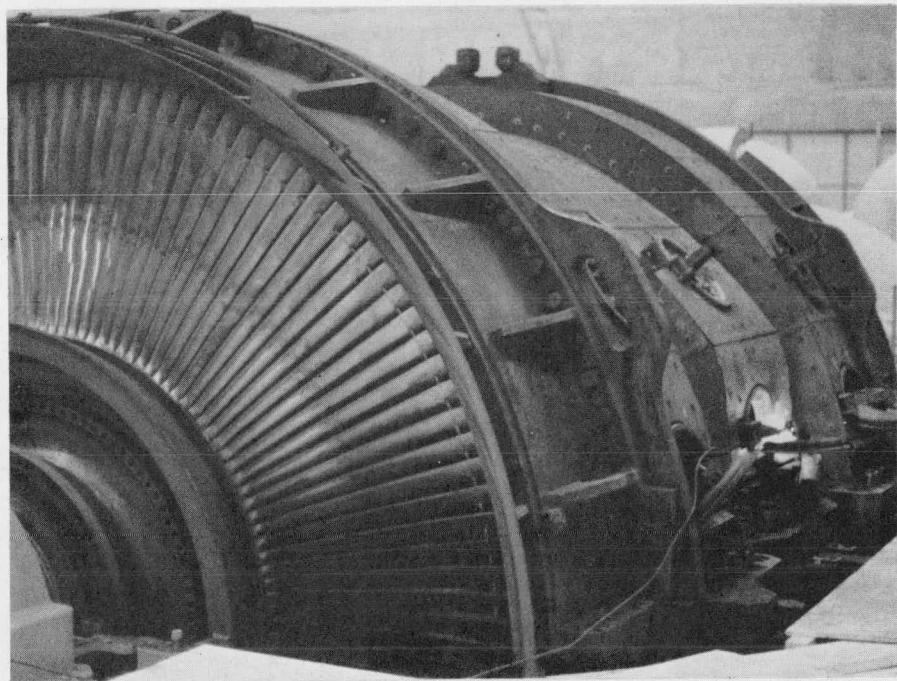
Feed Pump Turbine Rotor and Lower Casing (Browns Ferry)
